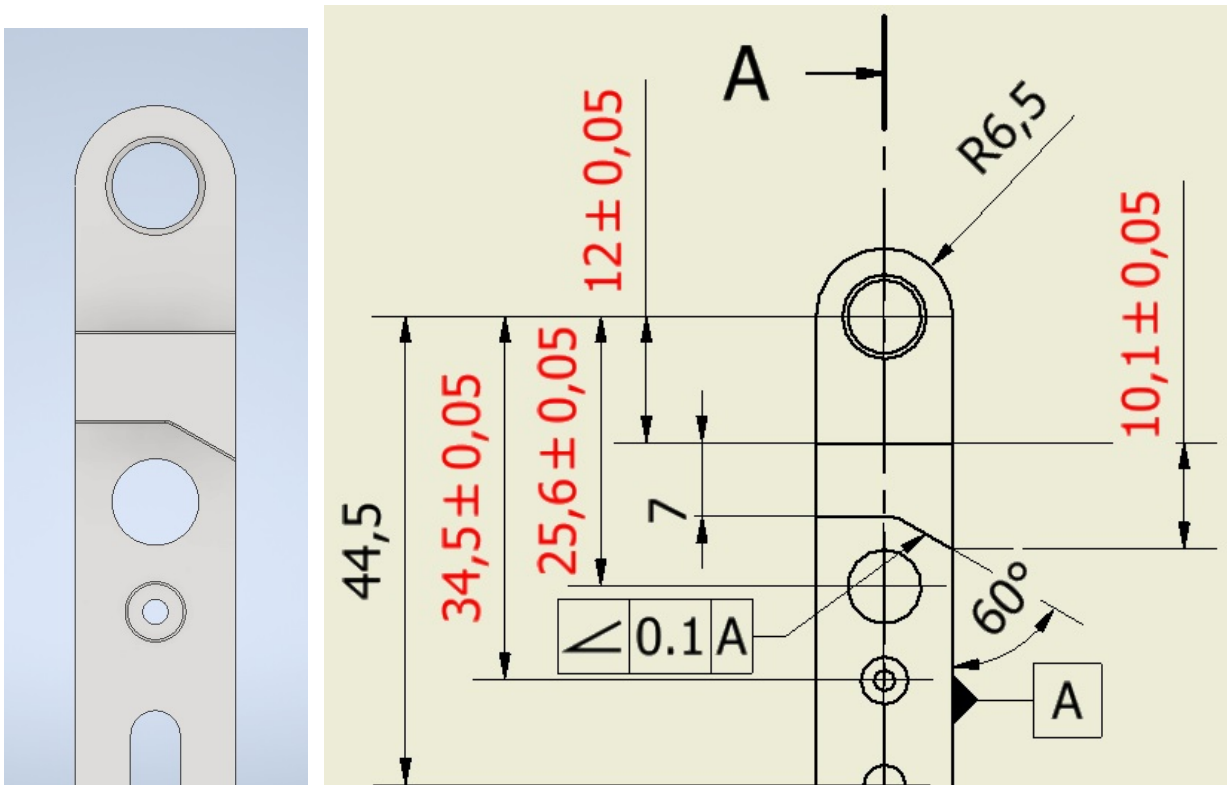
Dimensional and geometric tolerances after FMEA application.
